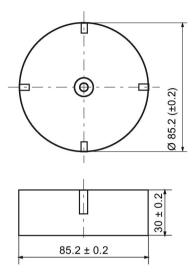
Dimension drawing of spacer 6GT2690-0AA00
